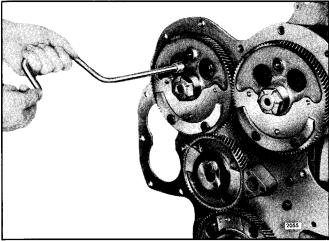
Removing or Installing Thrust Washer Retaining Bolts
